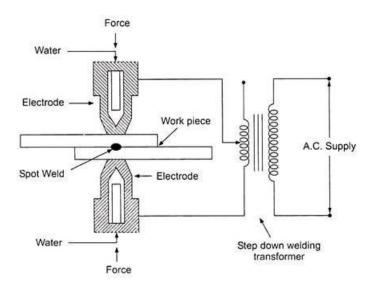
Principle of Resistance Spot Welding (RSW)
